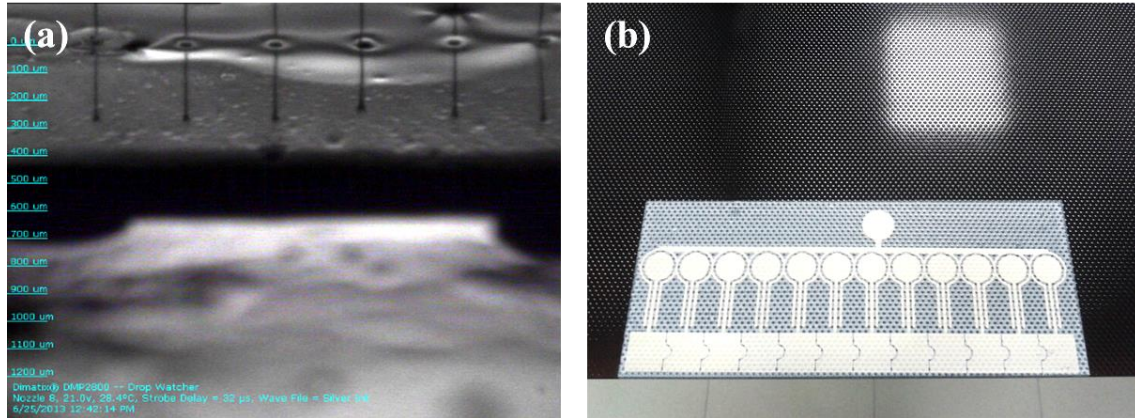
(a) Dimatix’s DMC-11610 printhead, where 23VA12-1 ink (alumina-ink) is being printed and ink spreads (puddle) over nozzle platen. (b) Printed insulating (23VA12-1 ink) layer (140 mm x 55 mm) by means Xaar XJ128 printhead over a silver printed touch control, as example of large printing stability.
